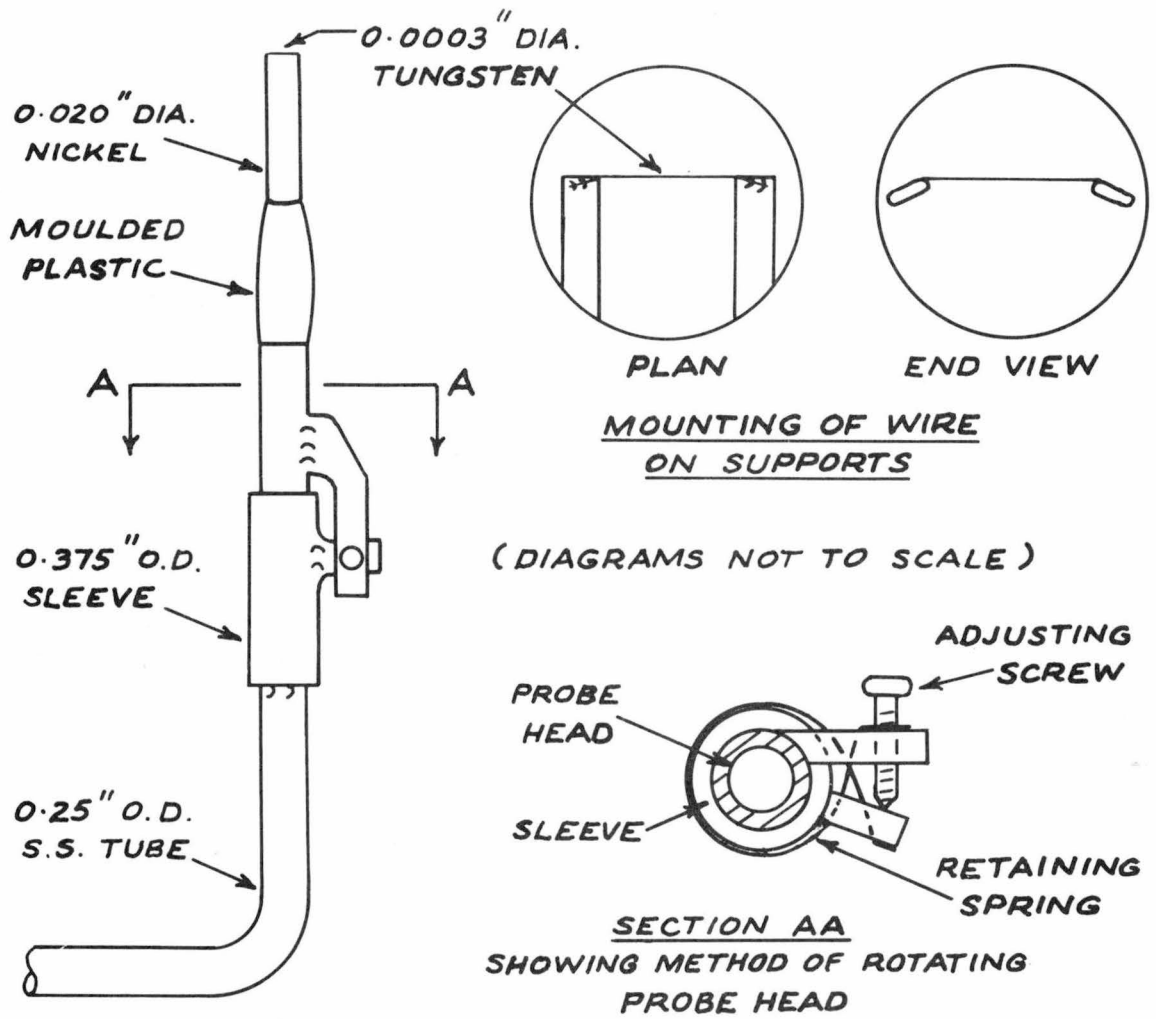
Hot Wire Probe - Details of Measuring Head
